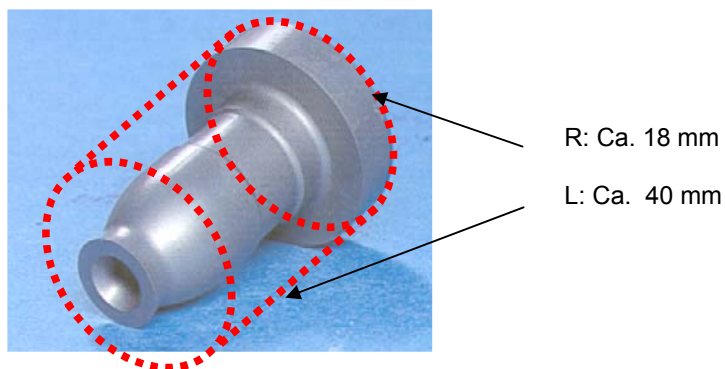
Combustion chamber of a positioning satellite thruster and minimum dimensions of the metal part from which to machine it.
